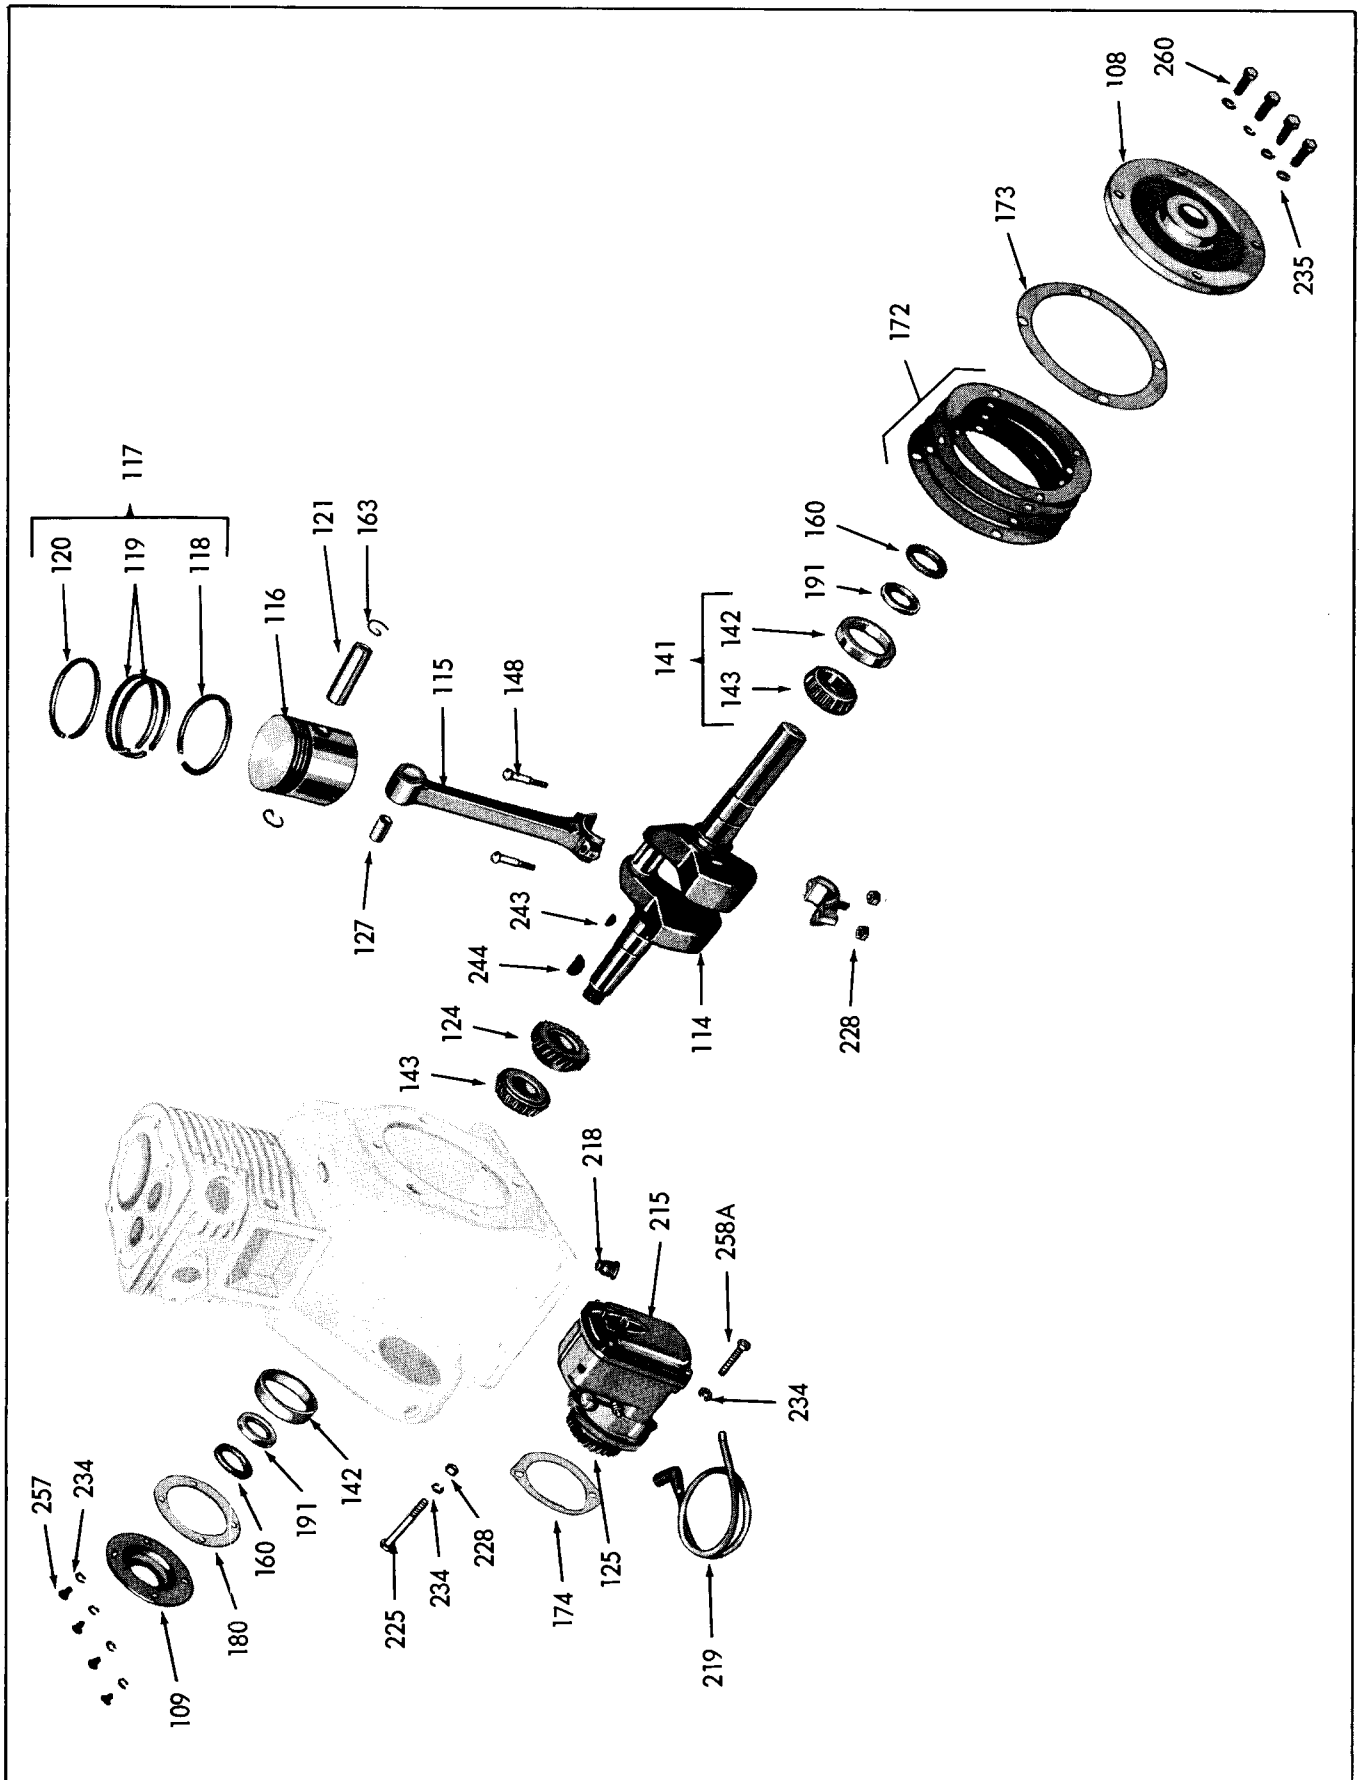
, BEARING PLATE, CRANKSHAFT, PISTON AND CONNECTING ROD GROUP
